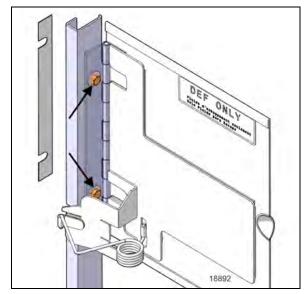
FUEL FILLER DOOR MOUNTING SCREWS
